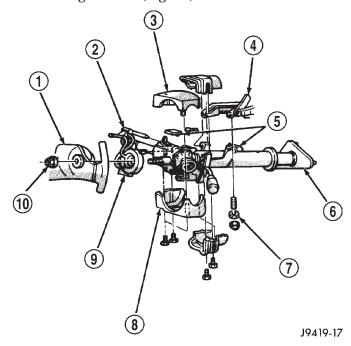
Steering Column Shrouds Remove/Install - Typical
